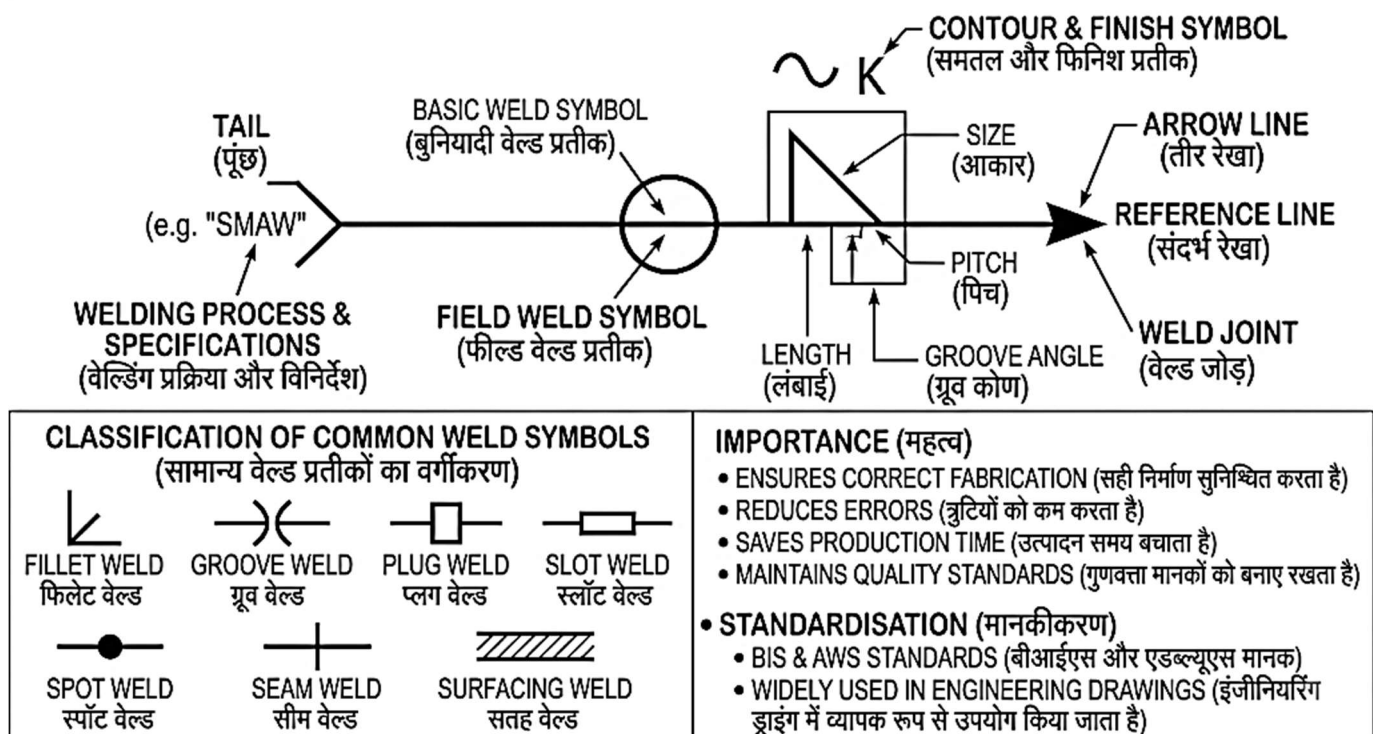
Basic Weld Symbols and Classification | मूल वेल्ड प्रतीक एवं वर्गीकरण
